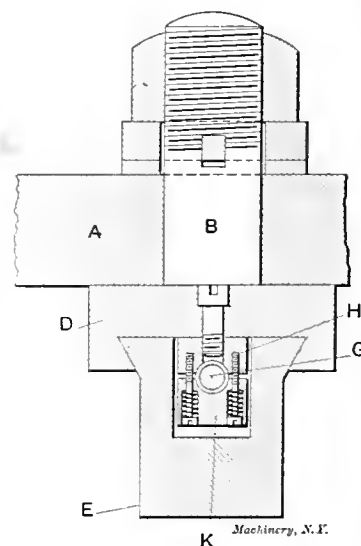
Section through Half-nut, Screw and Spindle Guiding Bracket.
